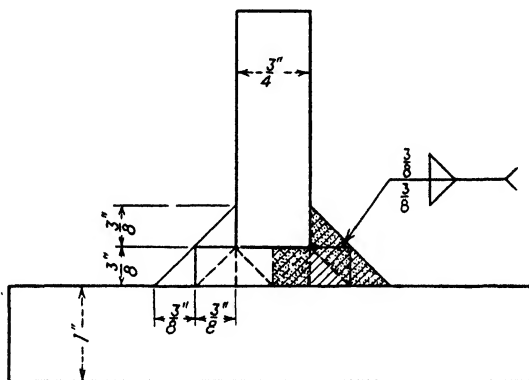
The result of a bad fit that leaves a gap equal to the size of the weld specified is that it requires, by ordinary welding practice, about five to six times the weld metal that is required for a properly fitting joint.
